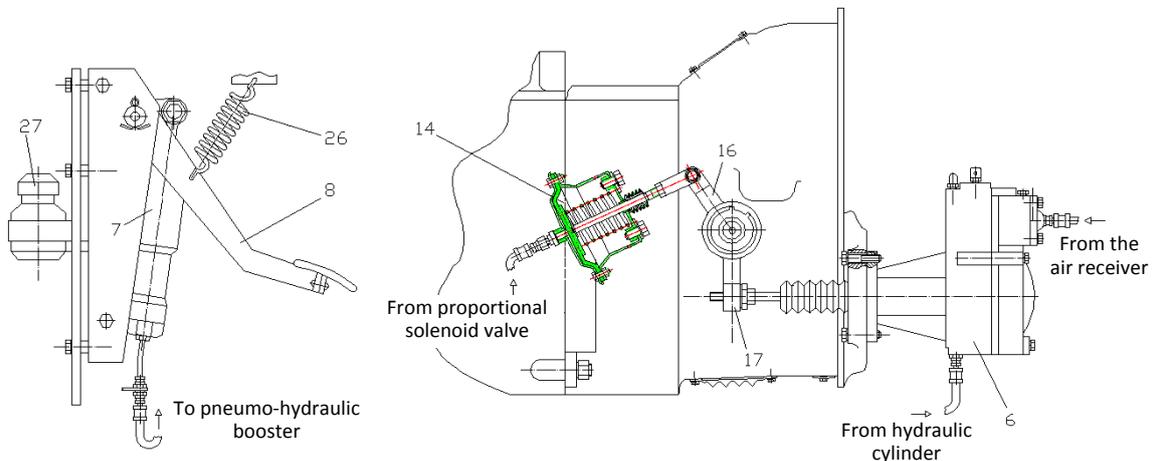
Duplex drive of dry friction clutch: 6 – pneumo-hydraulic booster; 7 – hydraulic cylinder; 8 – clutch pedal with return spring 26; 14 – clutch actuator; 16, 17 – clutch release levers; 27 – expansion tank
